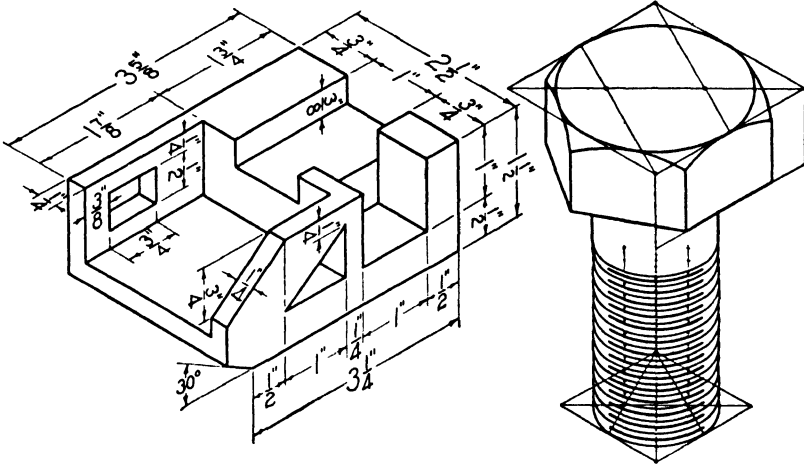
Dimensioning in isometric. FIG. 16. Screw threads in isometric.
